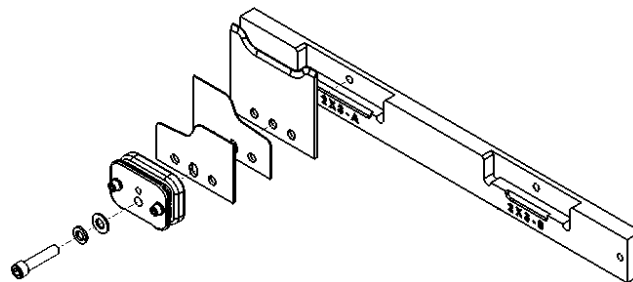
Mounting the knives and mandrel assembly to the side of the machine.
